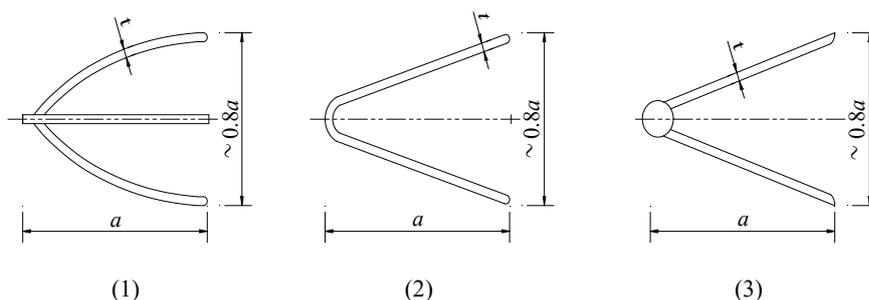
Propeller post welded with steel plates
